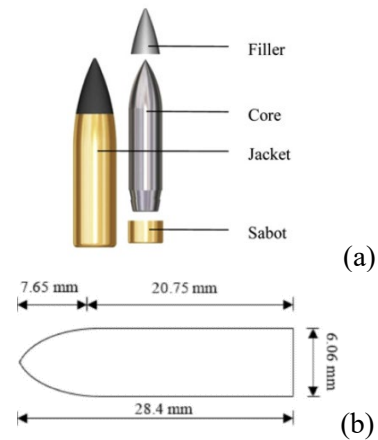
Bullet structure (a) assembly of bullet [2] (b) dimension of bullet [5].
